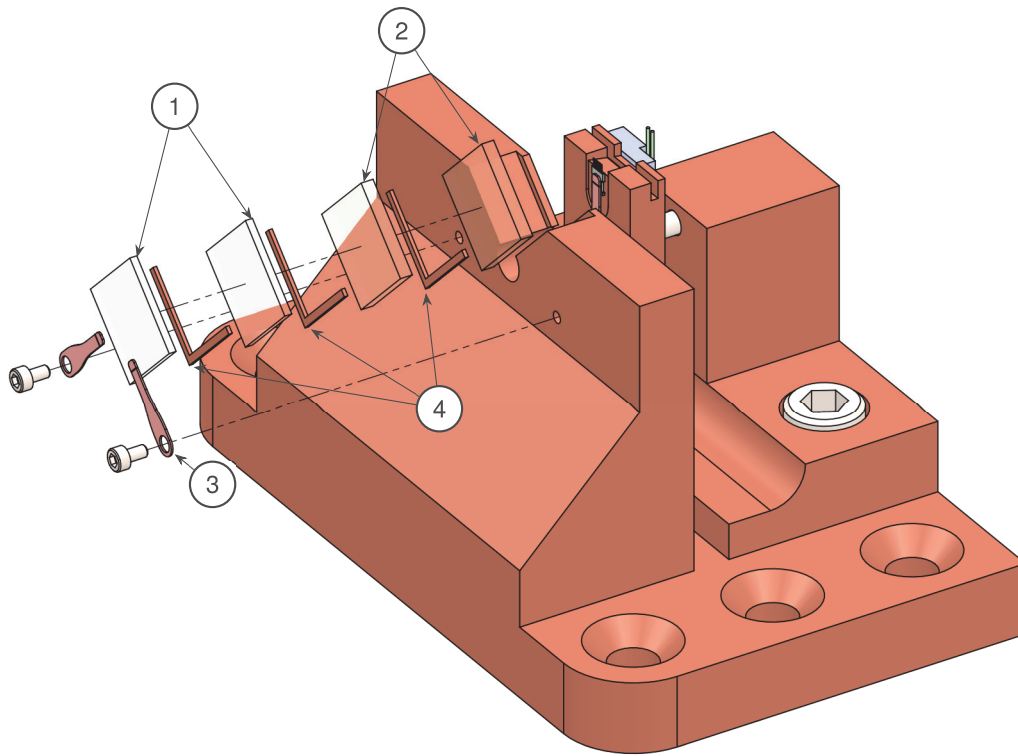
Detail of the Semel-Savart plate assembly on the cryo holder.
